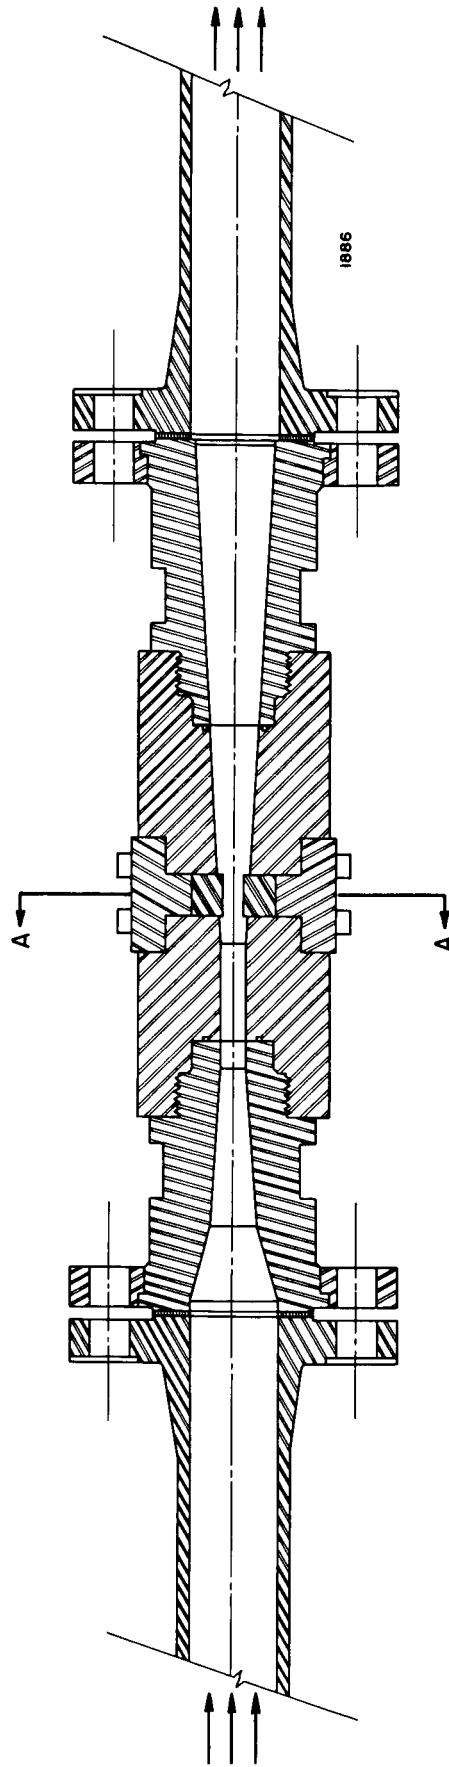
1/2" stainless steel damage venturi, 180° 2-specimen orientation, as installed in mercury facility.
